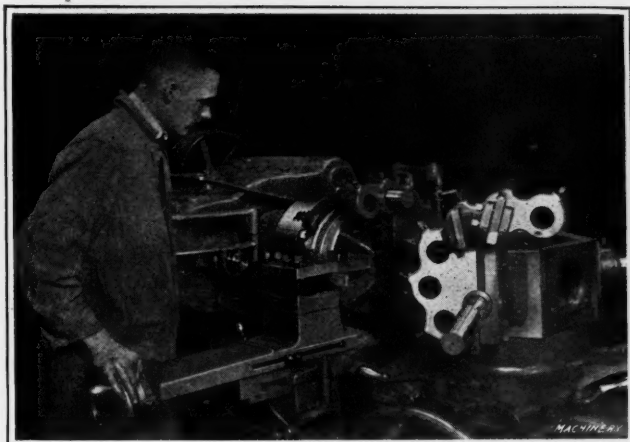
Lay-out of Tools used in finishing Piston Valve Follower shown in Fig. 1
